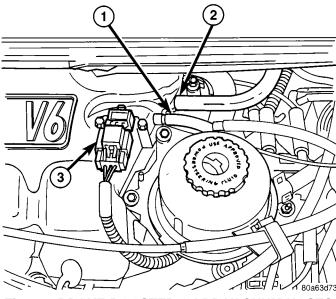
BRAKE BOOSTER & LDP VACUUM HOSES
